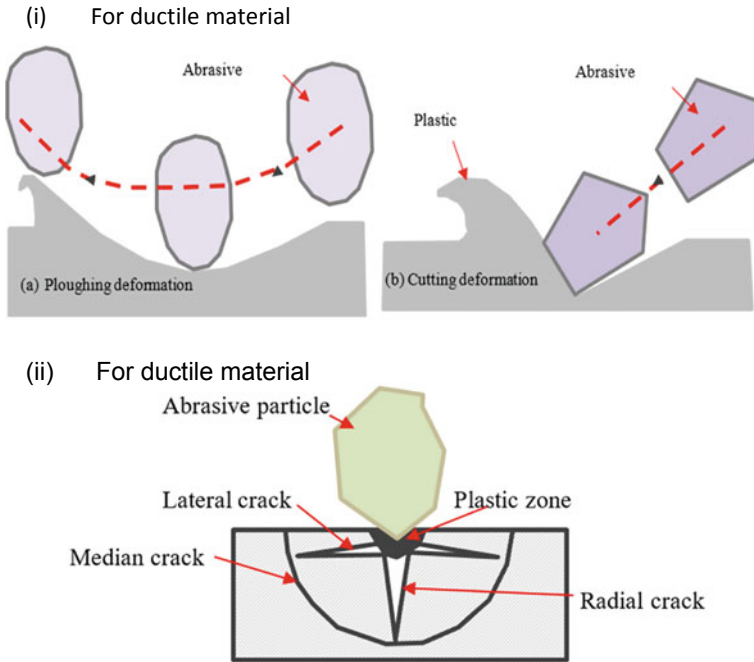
Micro-mechanism of machining (i) ductile material and (ii) brittle material [9]
